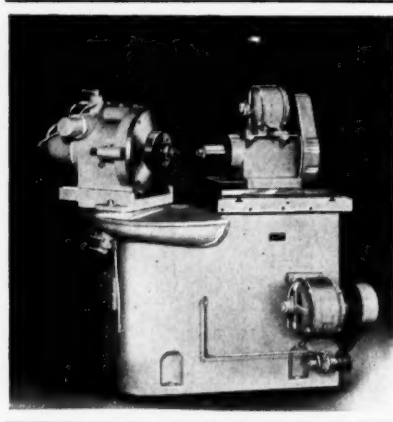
Machine for Pointing, Burring, and Chamfering Gears
